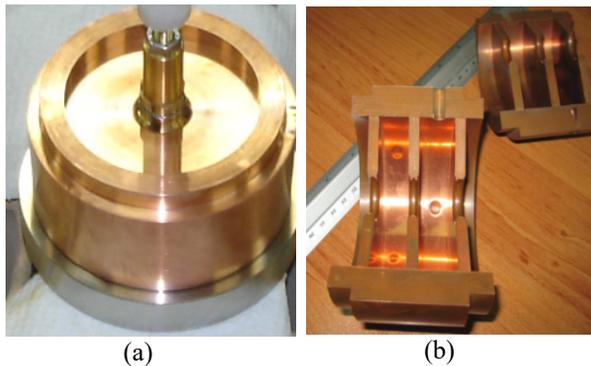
(a) Shrunked prototype (b) Wire cut view.
